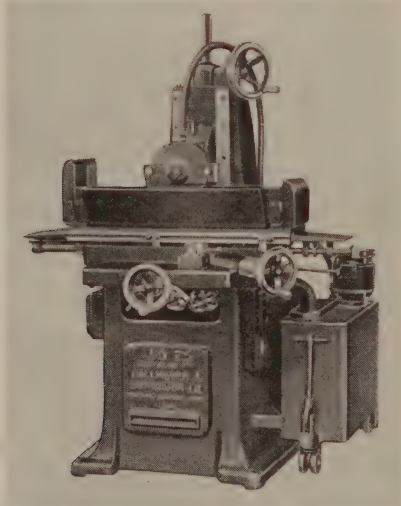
Hydraulically driven horizontal-spindle surface-grinding machine. Has stepless table speeds from 0 to 100 ft. per min., automatic feeds and cutting-lubricant system. (Courtesy of Gallmeyer and Livingston Company.)
